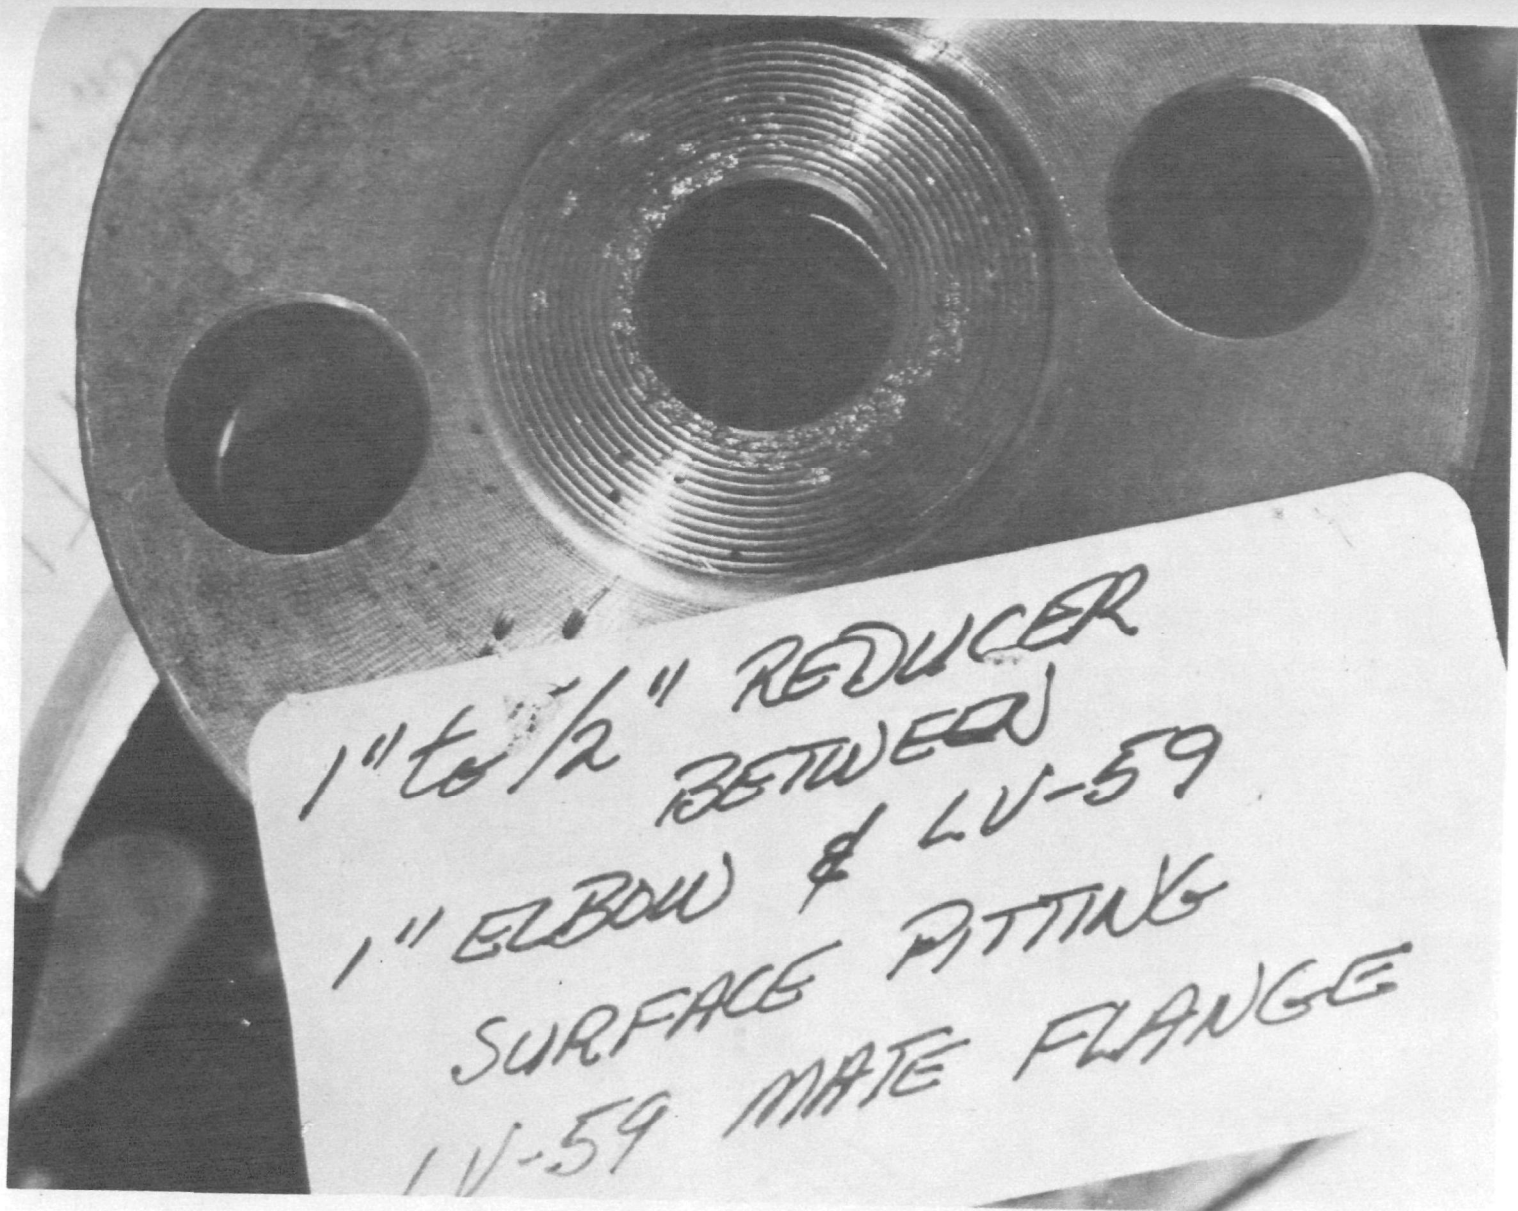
Face of Flange Mating with Low Level Control Valve LV-59.
